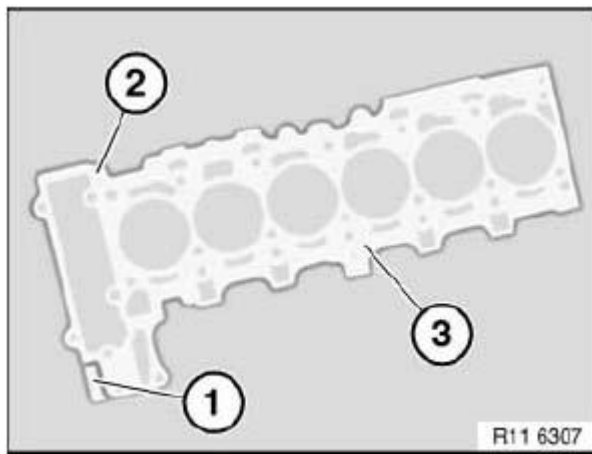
Identifying Sheet-Metal Gasket, Rubber Coating And Head Gasket Identification
